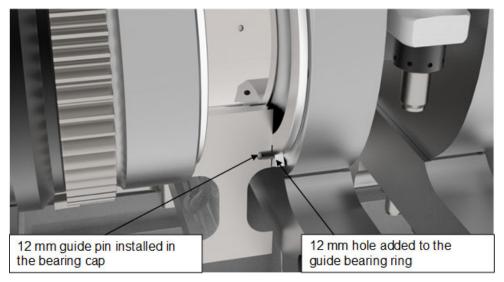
View of the application with guide pin and hole in the guide bearing ring
